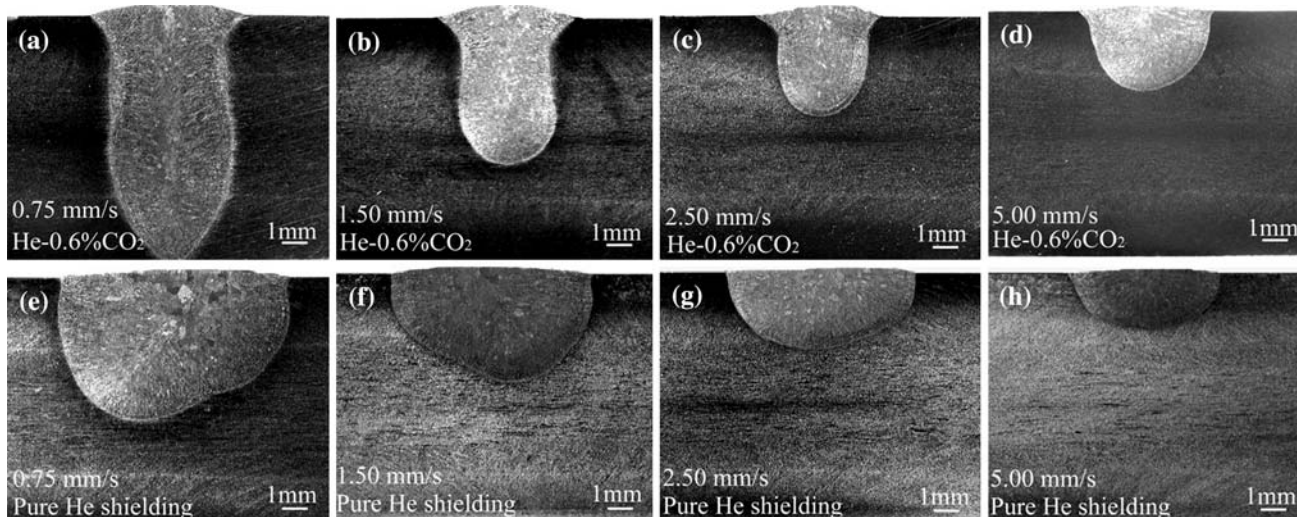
Weld shapes at different welding speed for pure He and He–0.6%CO₂ shielding gases
